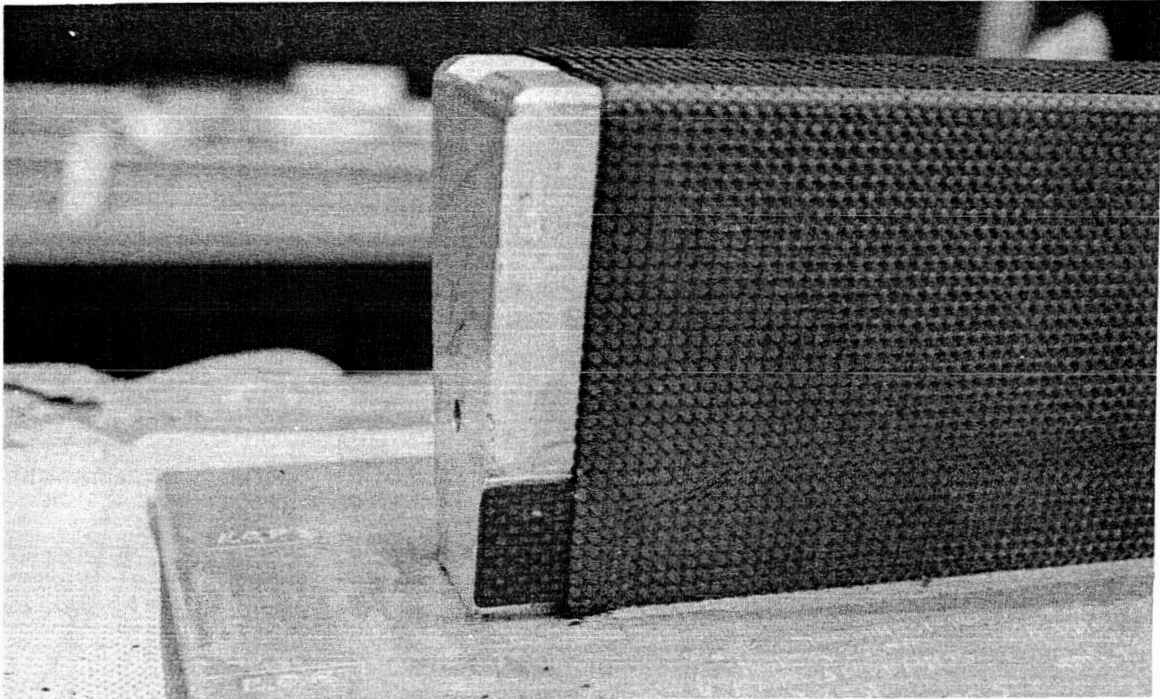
Rear-Spar Test Part Showing Initial Ply Layup Before Precured Filler
